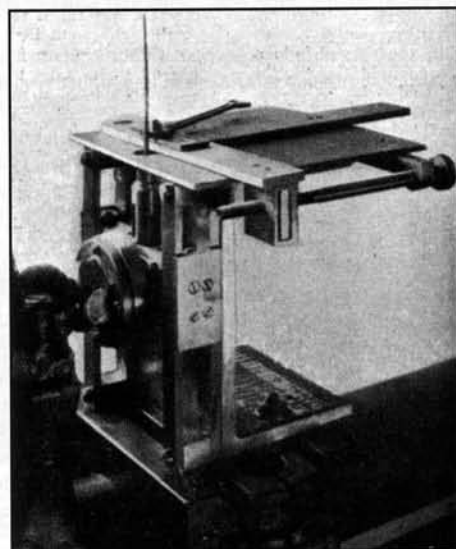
The machine complete on lathe, with a small coupling rod and pivot in position.
